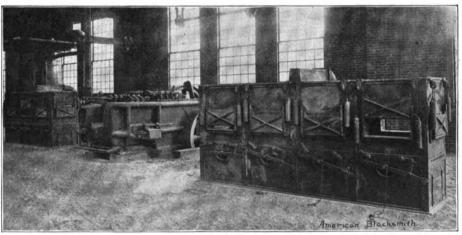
HEATING FURNACES MADE OF SECTIONS OF CAST IRON.
